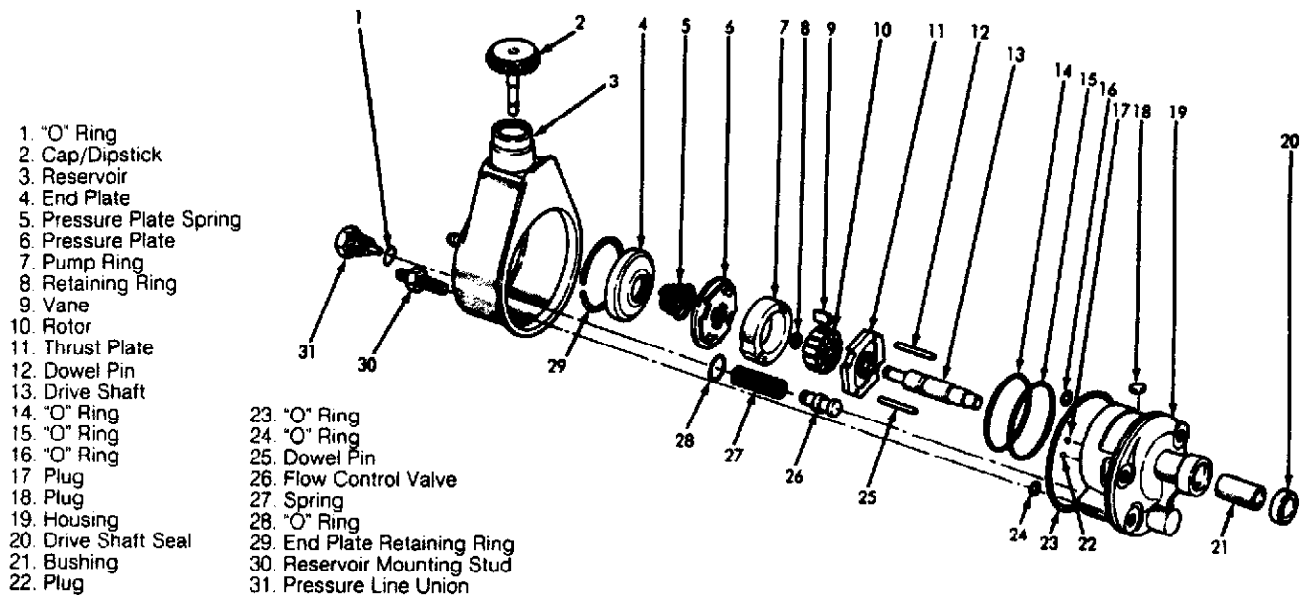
Exploded View of Pump Assembly (Grand Wagoneer & Wrangler)
